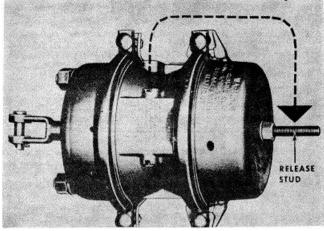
Release Stud Positioned In Air Chamber and Into Spring Pressure Plate
